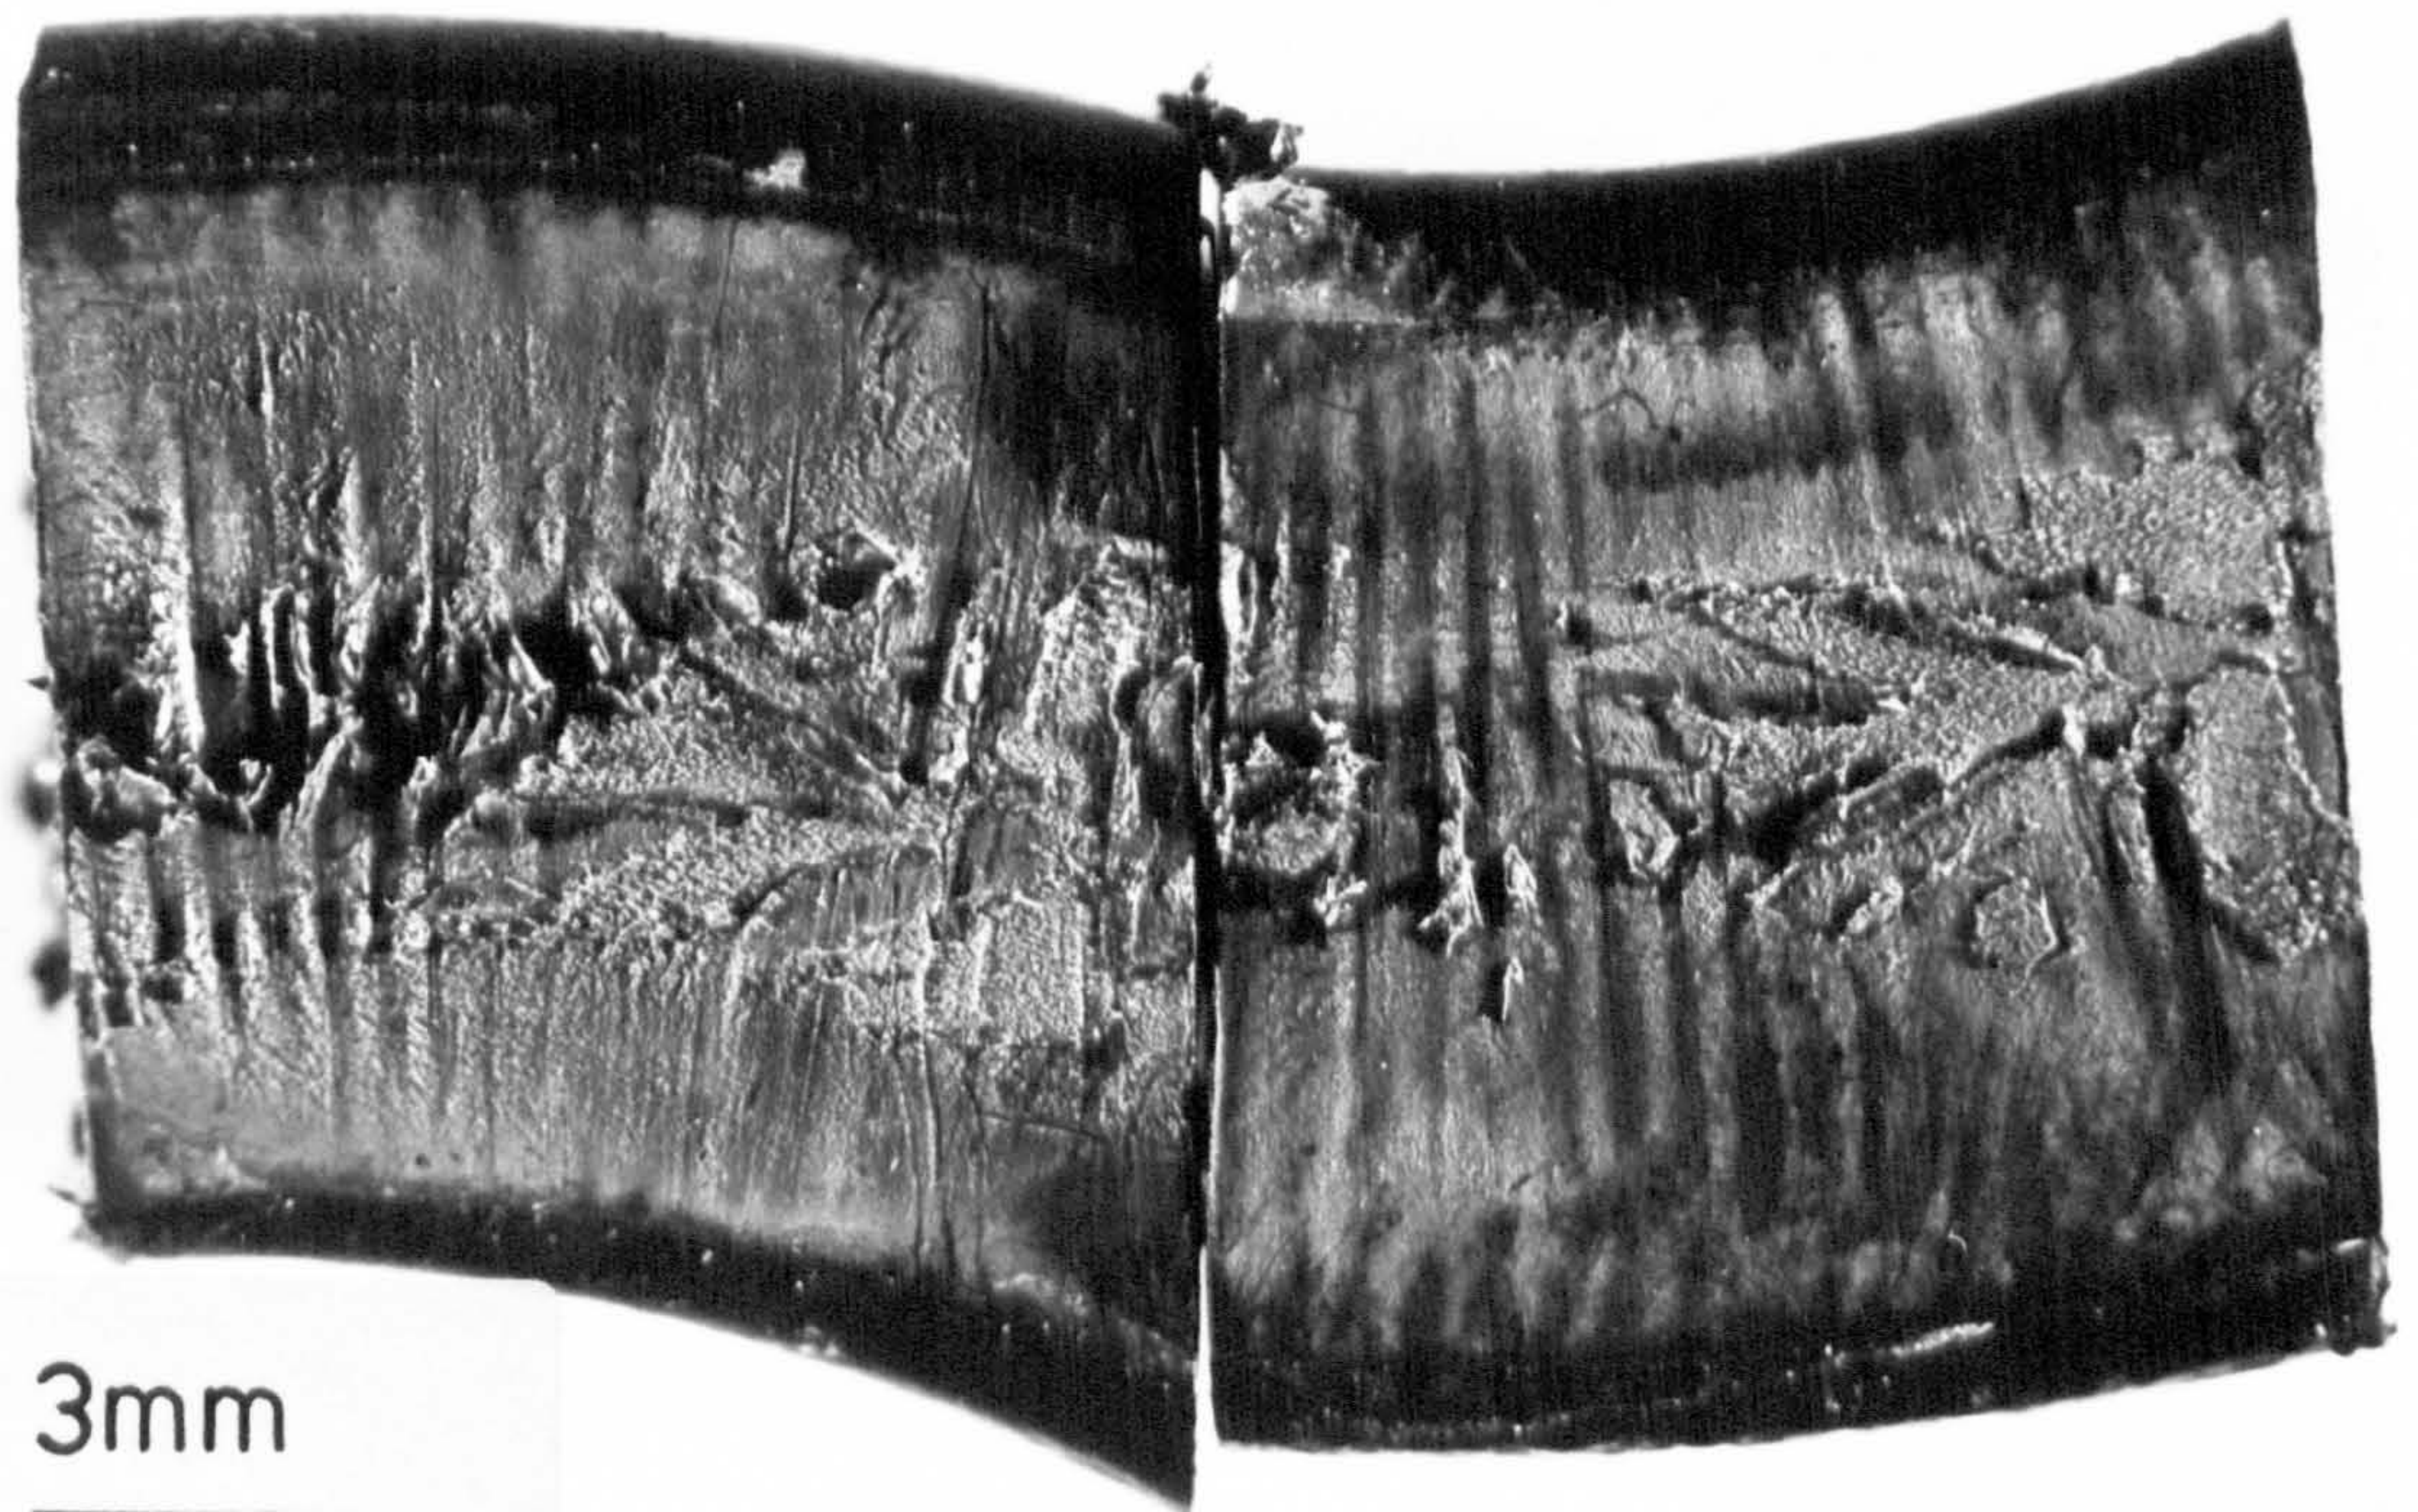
Fracture surface of a T2 type 2 butt-weld interface failure in an HDPE 1 pipe + batch A 90° equal tee system.
